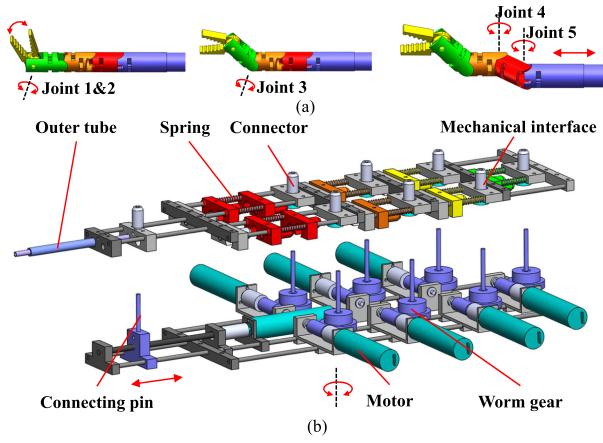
Details of the robotic system. (a) The manipulator's motion states; (b) Assembly of the driver system.
